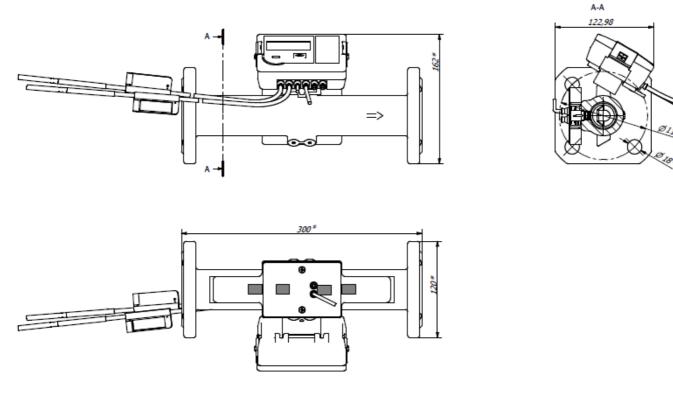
Flanged connection DN40, mounting lenght L =300 mm
